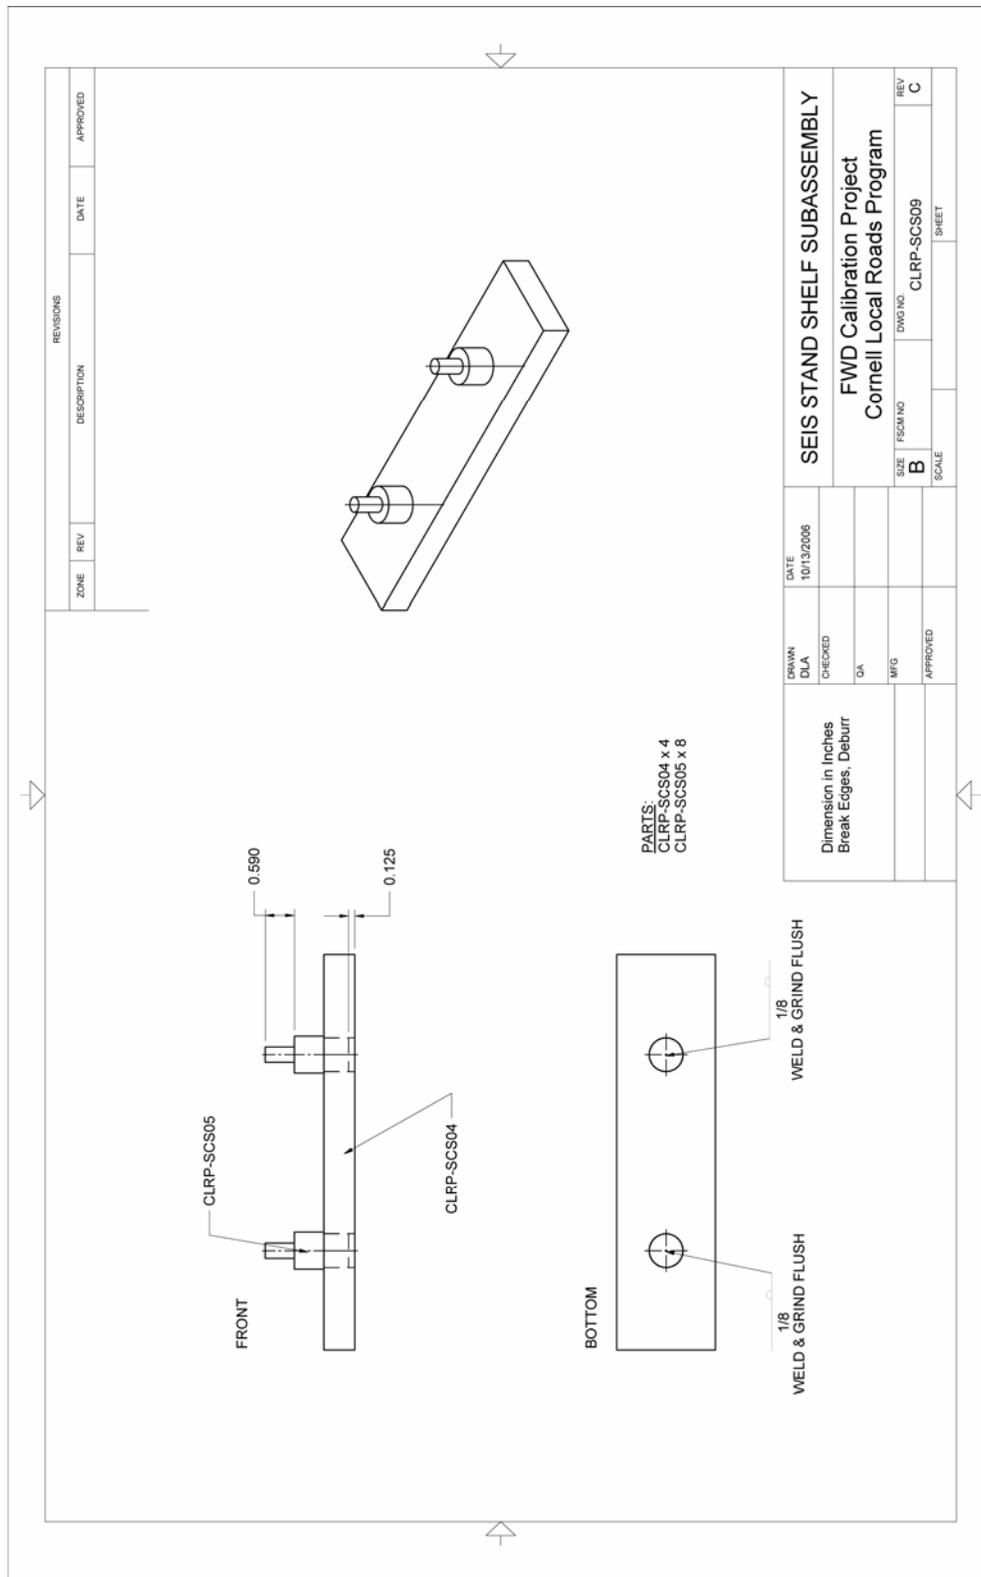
Drawing. CLRP-SCS09 Seismometer Stand Shelf Subassembly.
